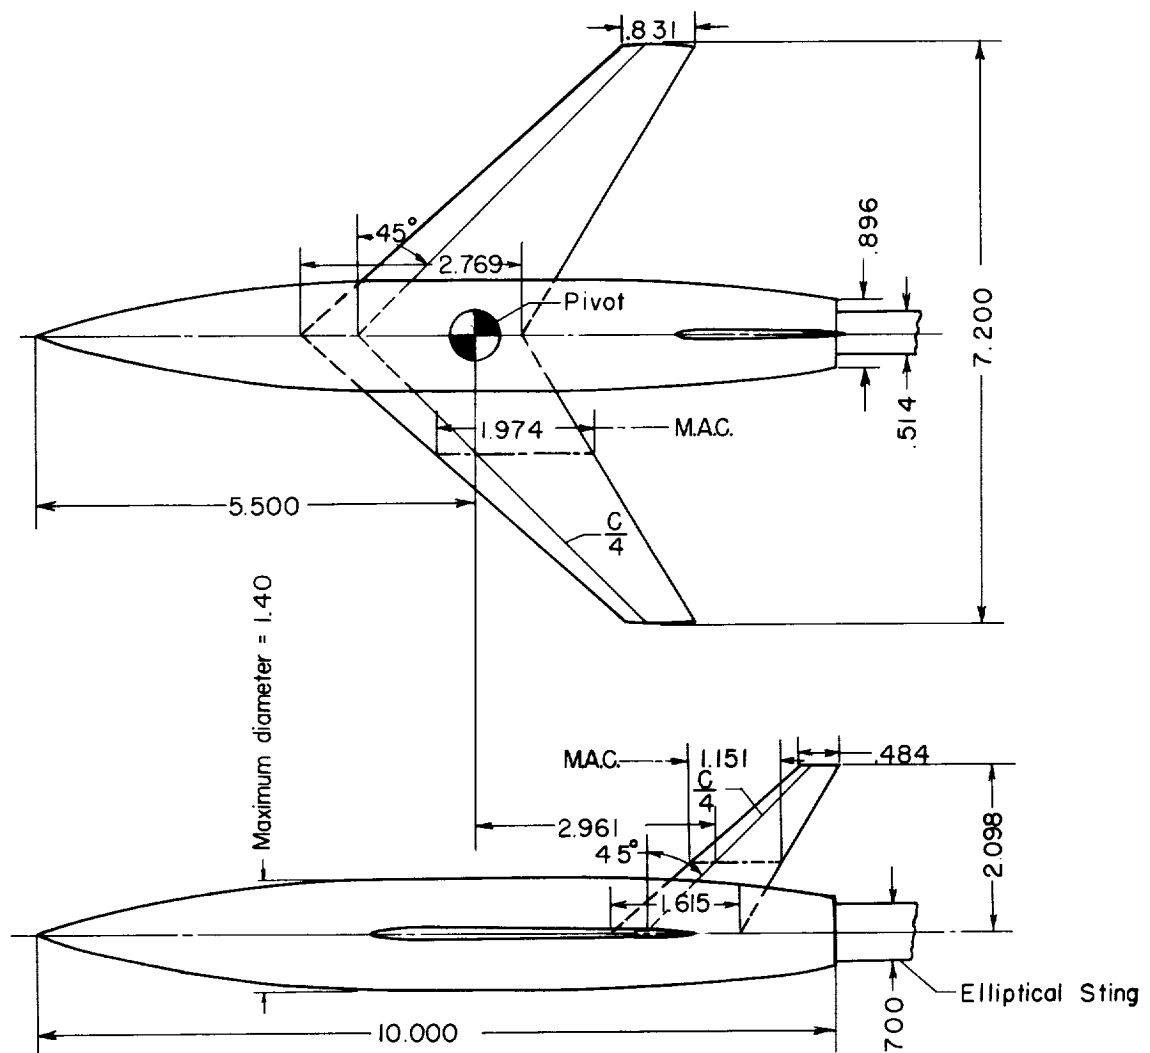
Two-view drawing of model. (All dimensions in inches.)
